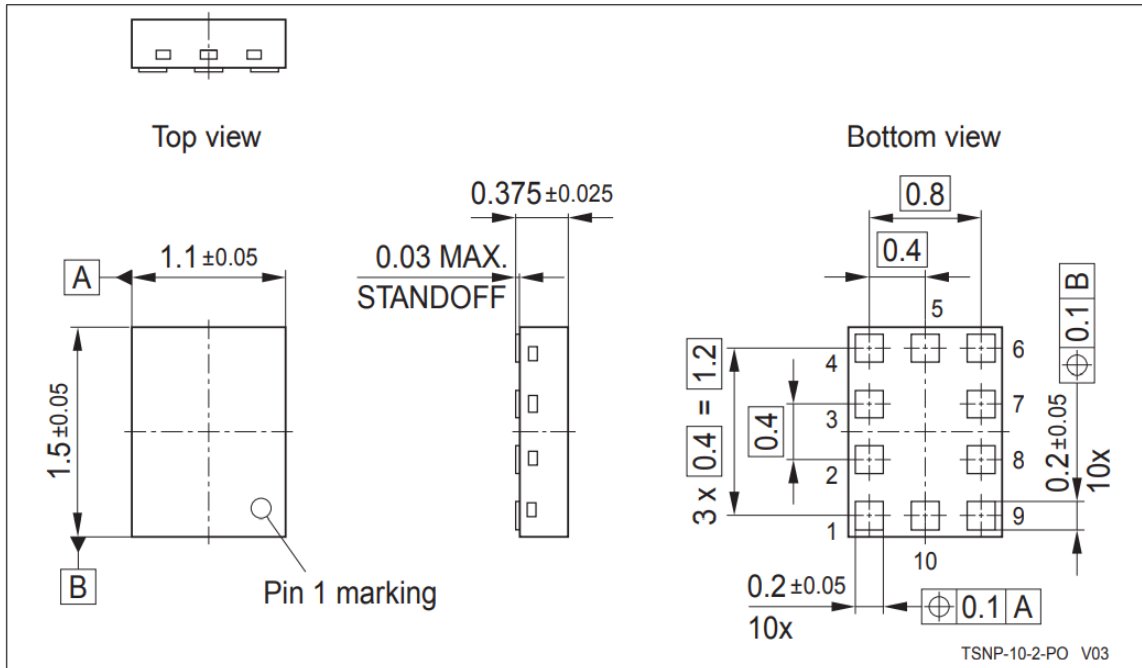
TSNP-10-2 Package Outline (Top, Side and Bottom Views)
